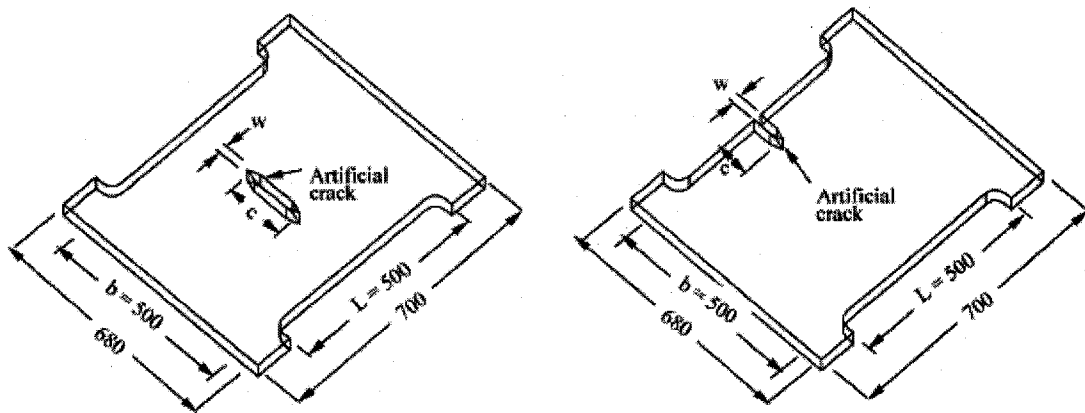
A schematic of a plate element with premised fatigue crack at the plate center or at the plate edge
